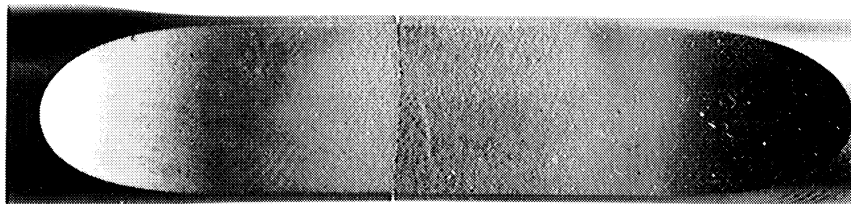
Kennametal Type 152 B No. 4, Showing Complete Fracture and Burning.
